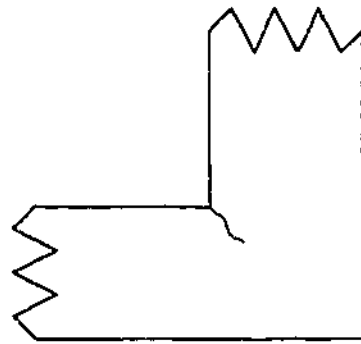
Corner cracking at an internal corner, eg. feed-water heater box.
